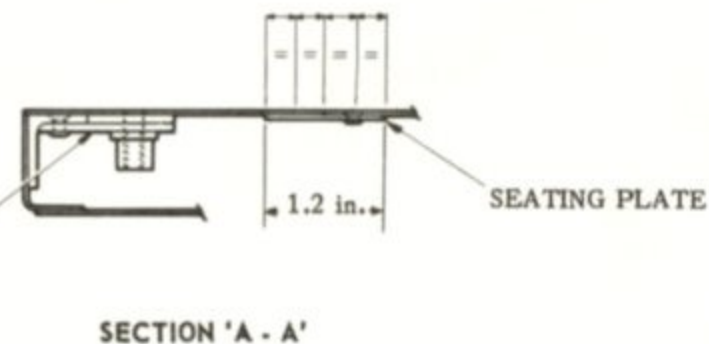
Skin insert repair at jet pipe end cap shear attachments
